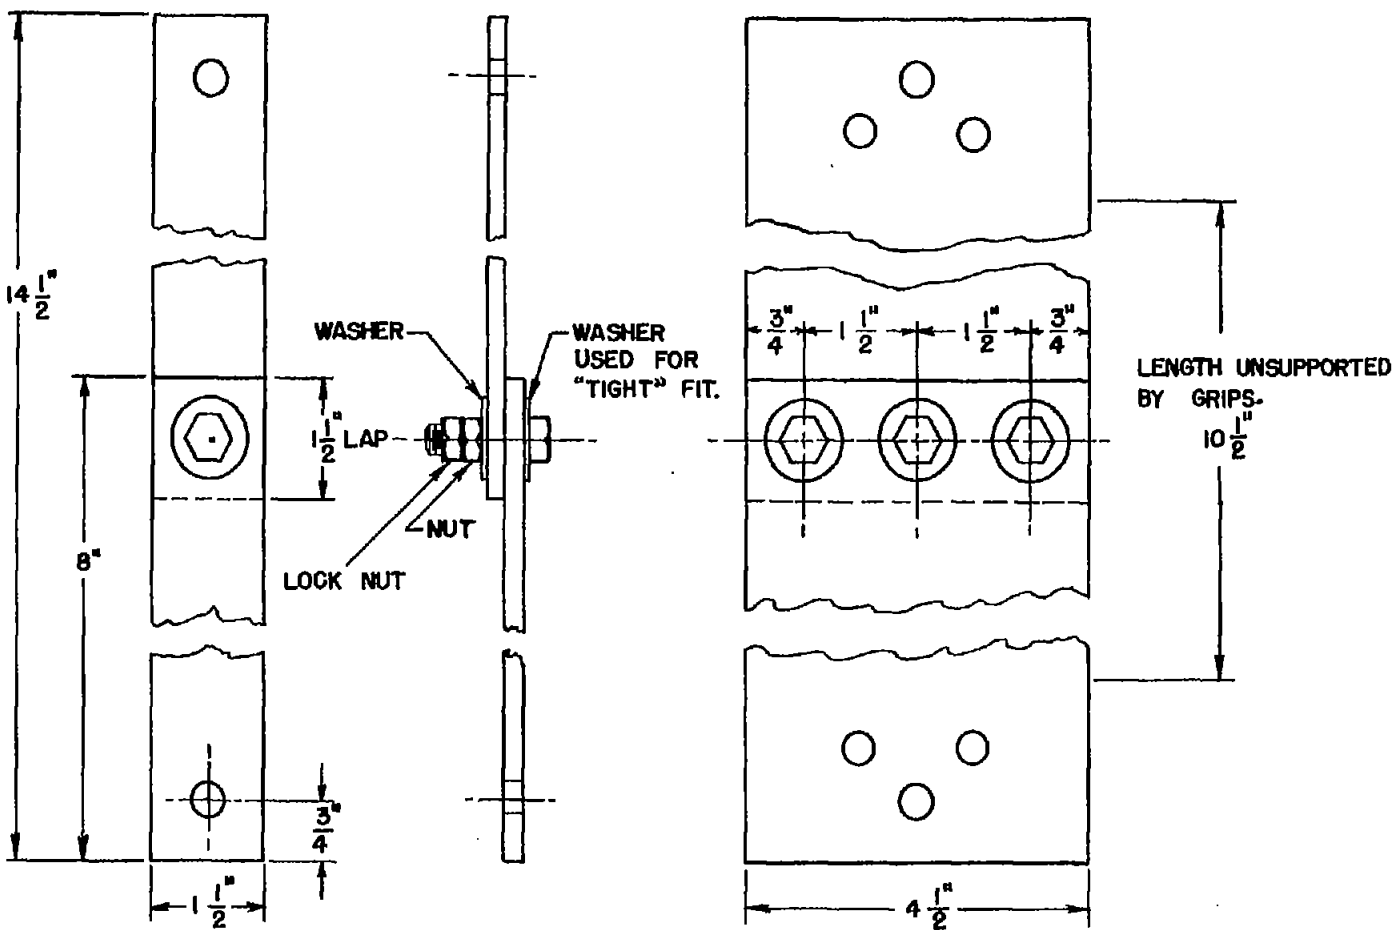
TYPICAL BOLTED - JOINT FATIGUE TEST SPECIMENS USED AT BATTELLE.
